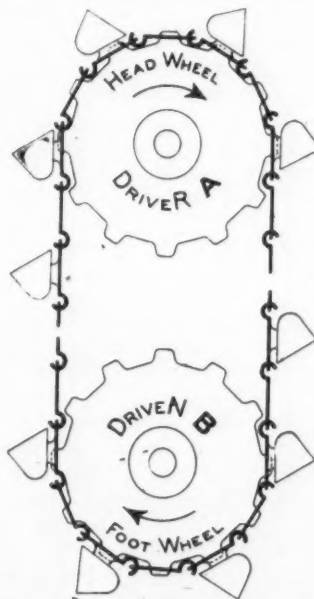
An Elevator Chain, with the Links Running Bar First.
